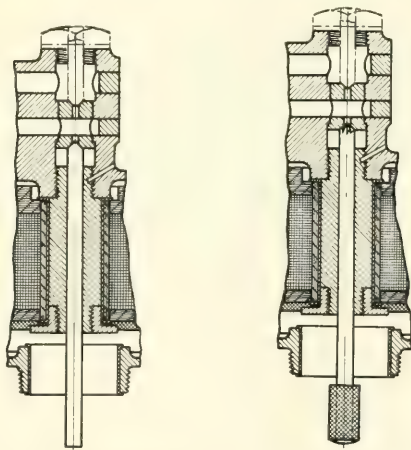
USE OF LOWER VALVE STEM SCRAPER
